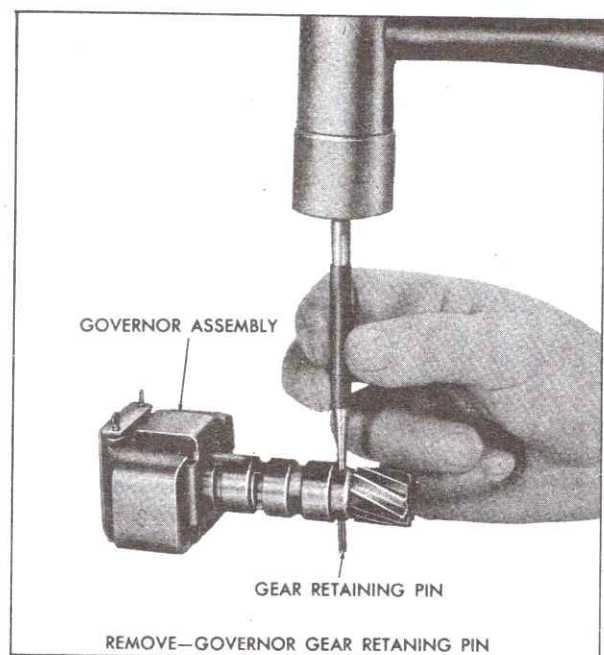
Removing Governor Driven Gear Retaining Pin
